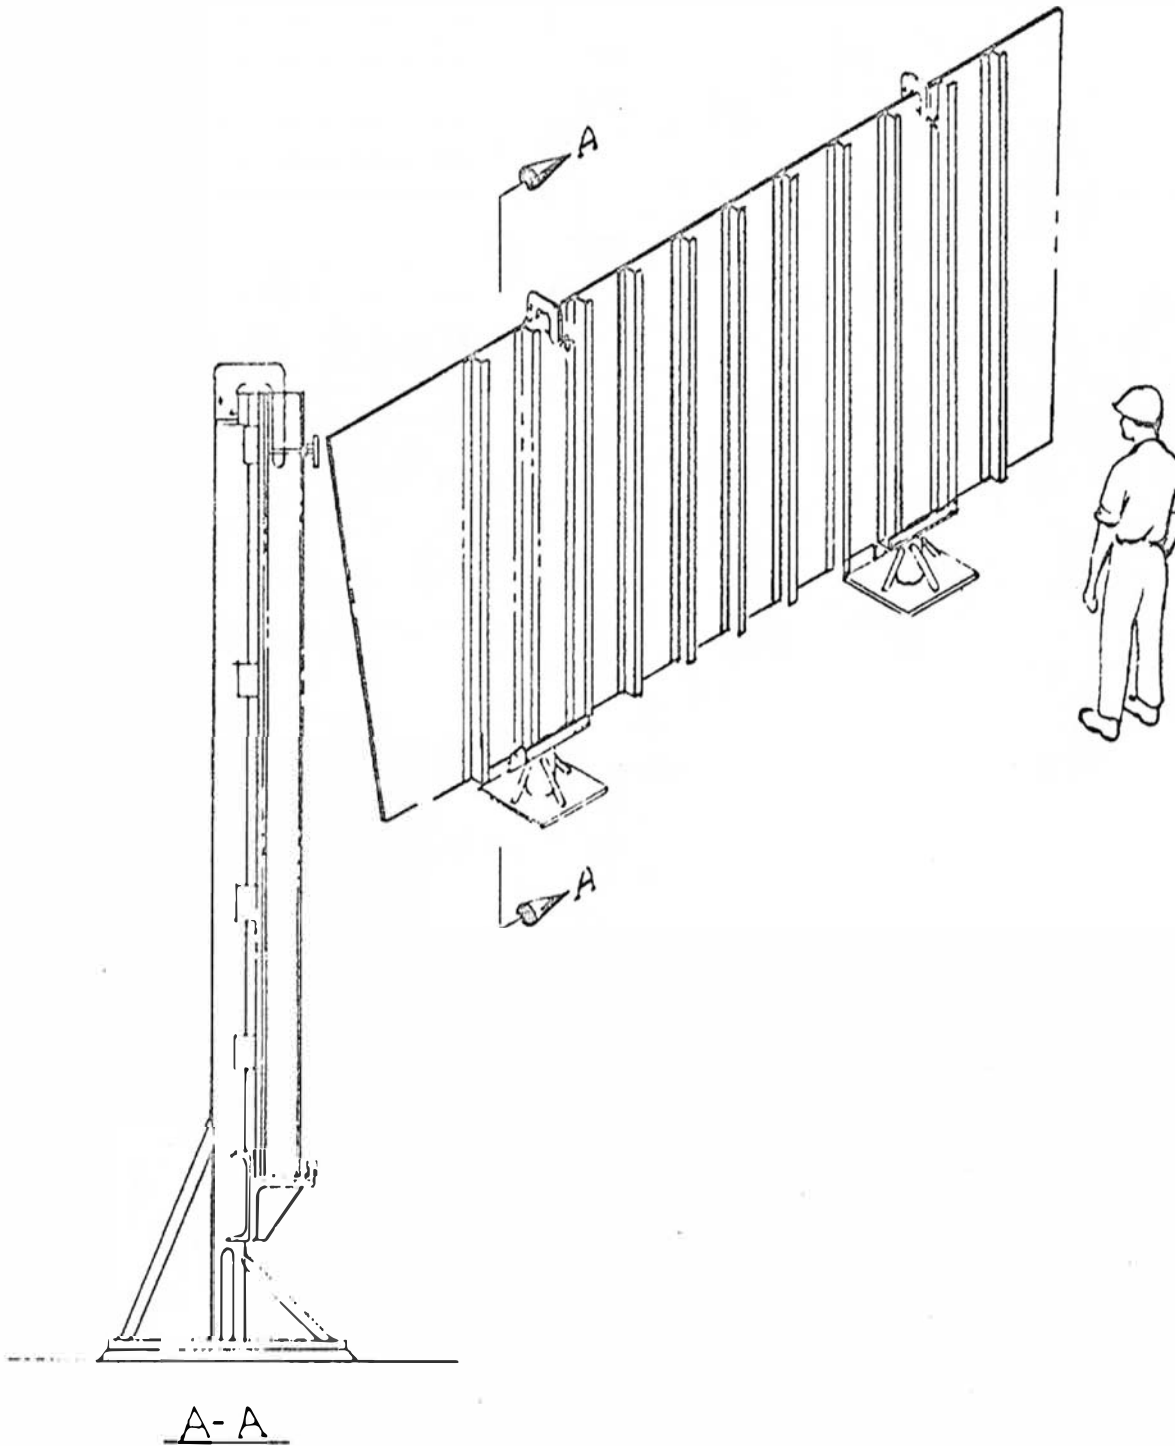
Center Engine Support Web Assemblies Support Fixture
